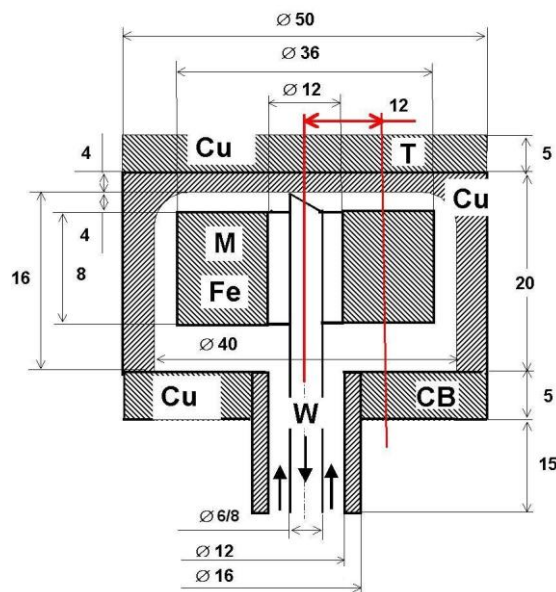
Scheme of magnetron: T – target; M – magnet; CB – cathode body (target holder); W – water flow
